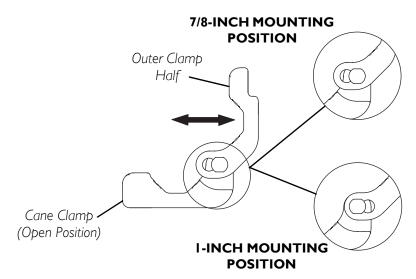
ADJUSTING THE CANE CLAMP SIZE
